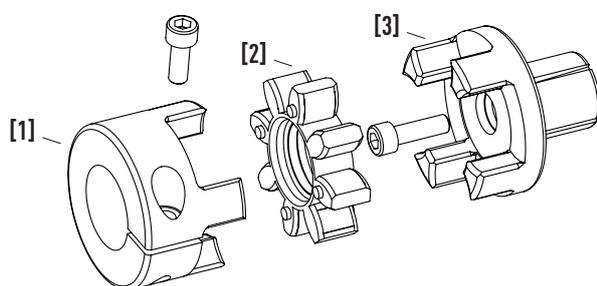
Coupling assembly variant 1: clamping hub with one clamping screw
